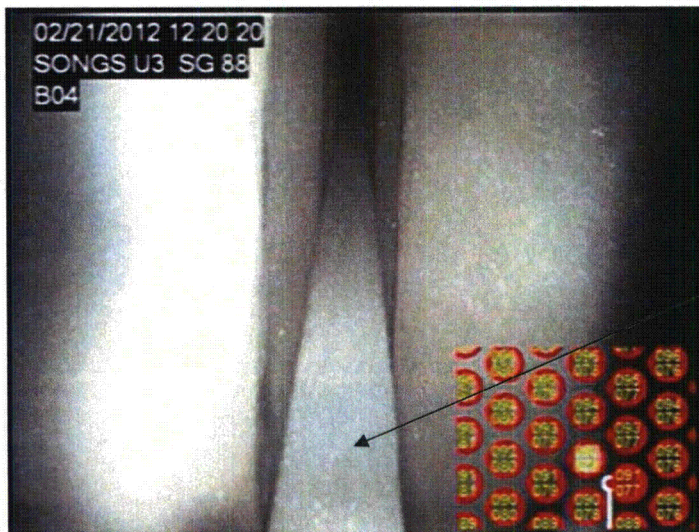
Tube Bundle Visual Inspection Image [Unit-3B]
